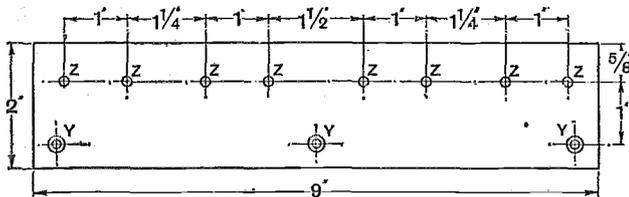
Dimensional drawing of terminal strip. Drilling sizes: Y, 1/8in., and countersunk for No. 4 wood screw; Z, 5/32in.
